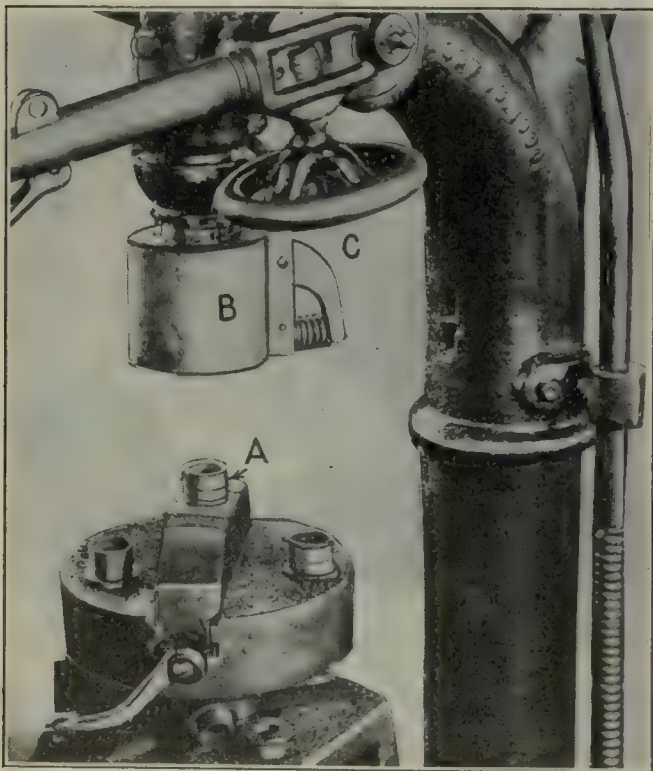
DEVICE FOR TURNING GROOVE IN BUSHINGS
